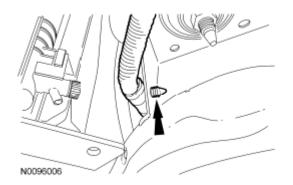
Locating EPAS System Wiring Harness Pin-Type Retainer Courtesy of FORD MOTOR CO.
